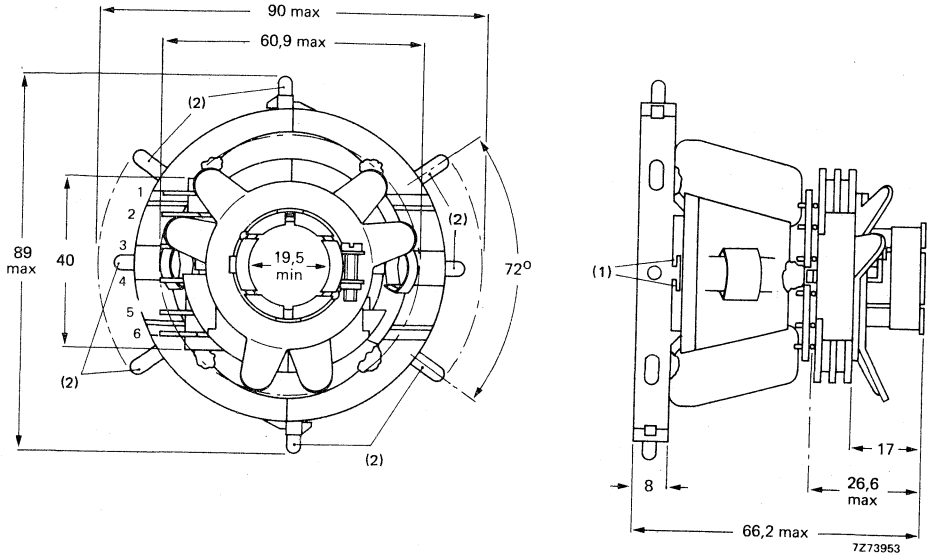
Deflection unit AT1074. Facilities for fitting correction magnets:
